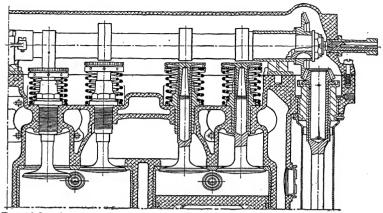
Arrangement of the valve gear used on the Hispano-Suiza, model-H engine.
